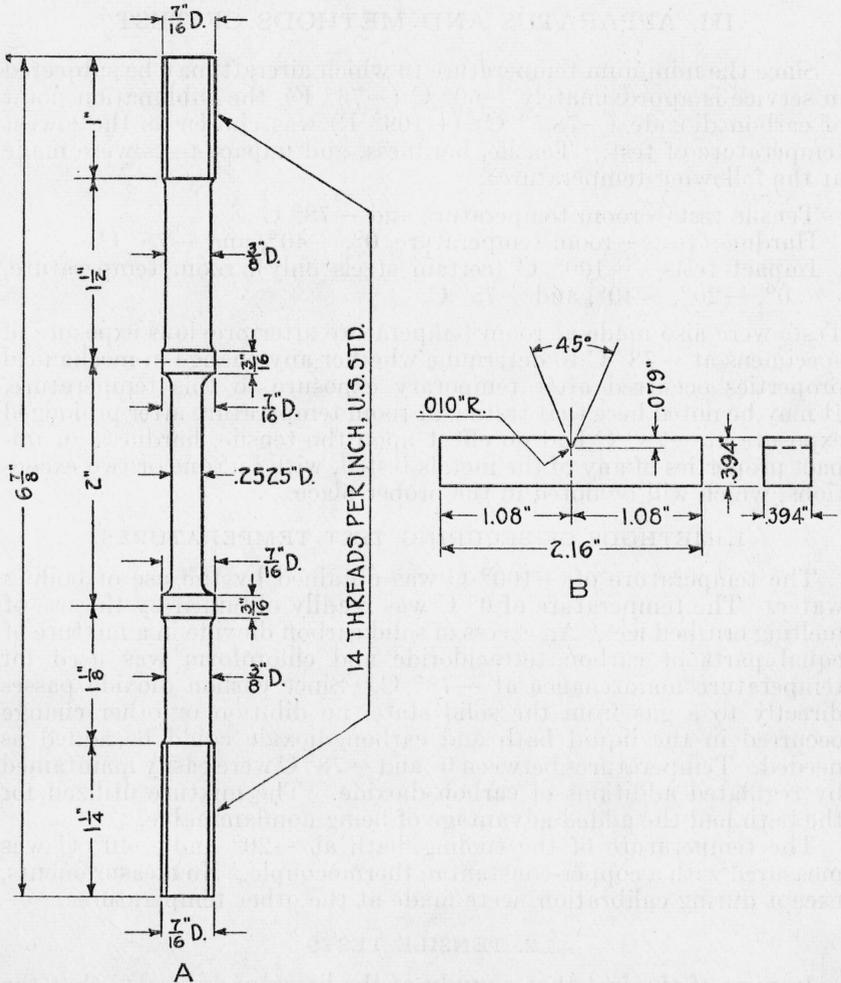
Specimens used for tensile and impact tests of all materials except the wrought aluminum alloys.
